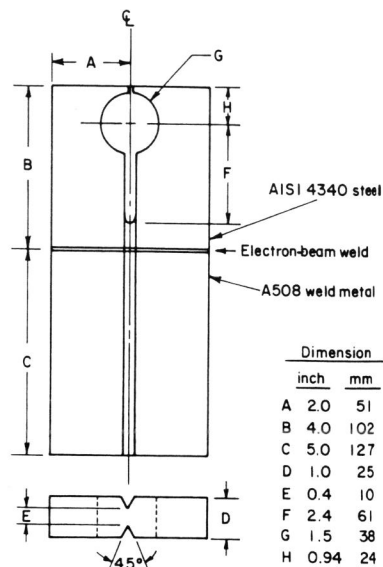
Duplex DCB specimen for crack-arrest tests.
